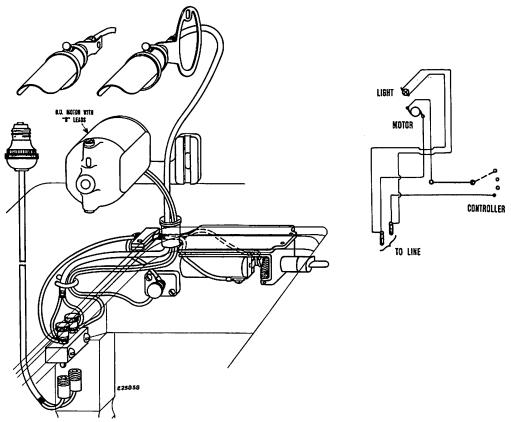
Wiring Diagram for BU3B to BU92B Motors on 15, 66, 115 and 127 Machines in Cabinet Set No. 302
